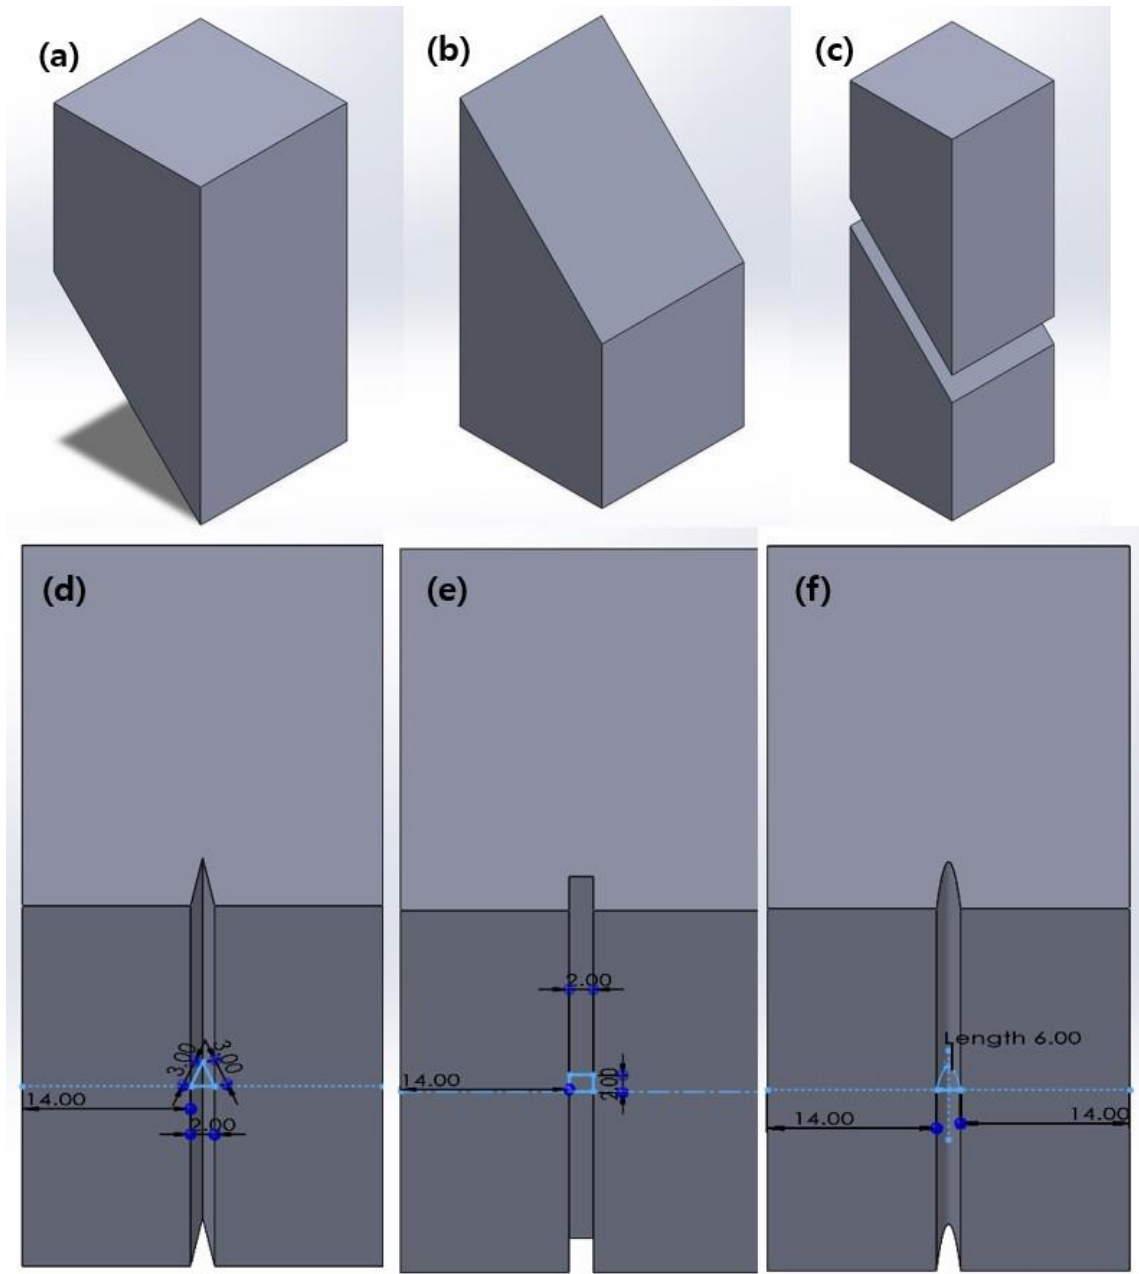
Base model without metasurfaces on the contact area: (a) top part, (b) bottom part, and (c) assembled model. Various patterns – (d) isosceles triangle, (e) rectangle, and (f) half-ellipse are suggested to investigate the performance of metasurfaces.
